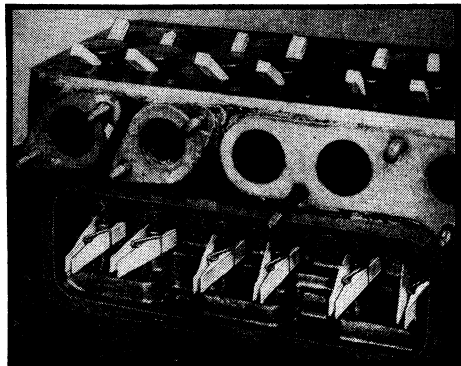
Method of holding up valves and tappets for camshaft removal on six-cylinder chain-driven engines
